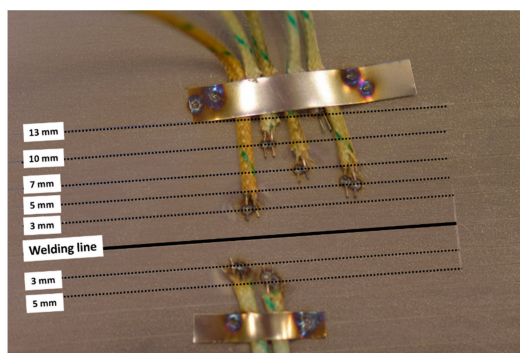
Position of thermocouples regarding the distance from the welding bead. Thermocouples were spot welded on the sample at distances of 3, 5, 7, 10, and 13 mm from the weld line.
